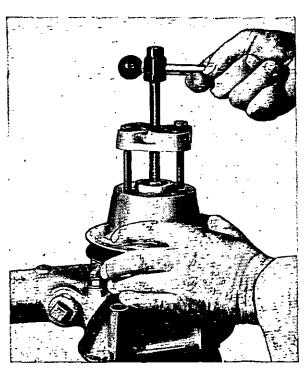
Removing Water Pump Pulley (Low Position Type Water Pump).
